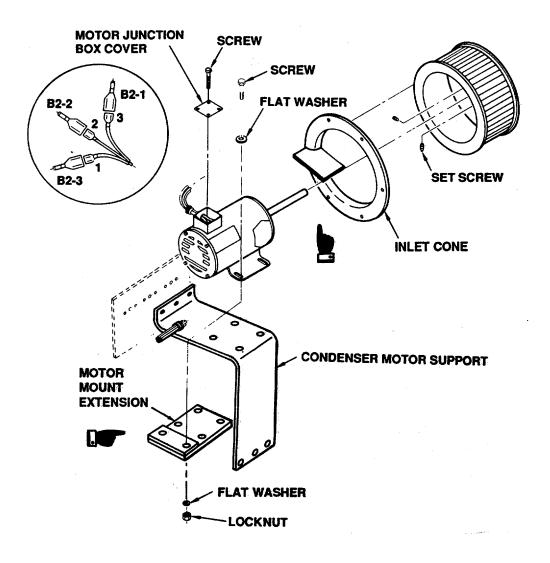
Condenser motor (B2) Removal/Replacement.
